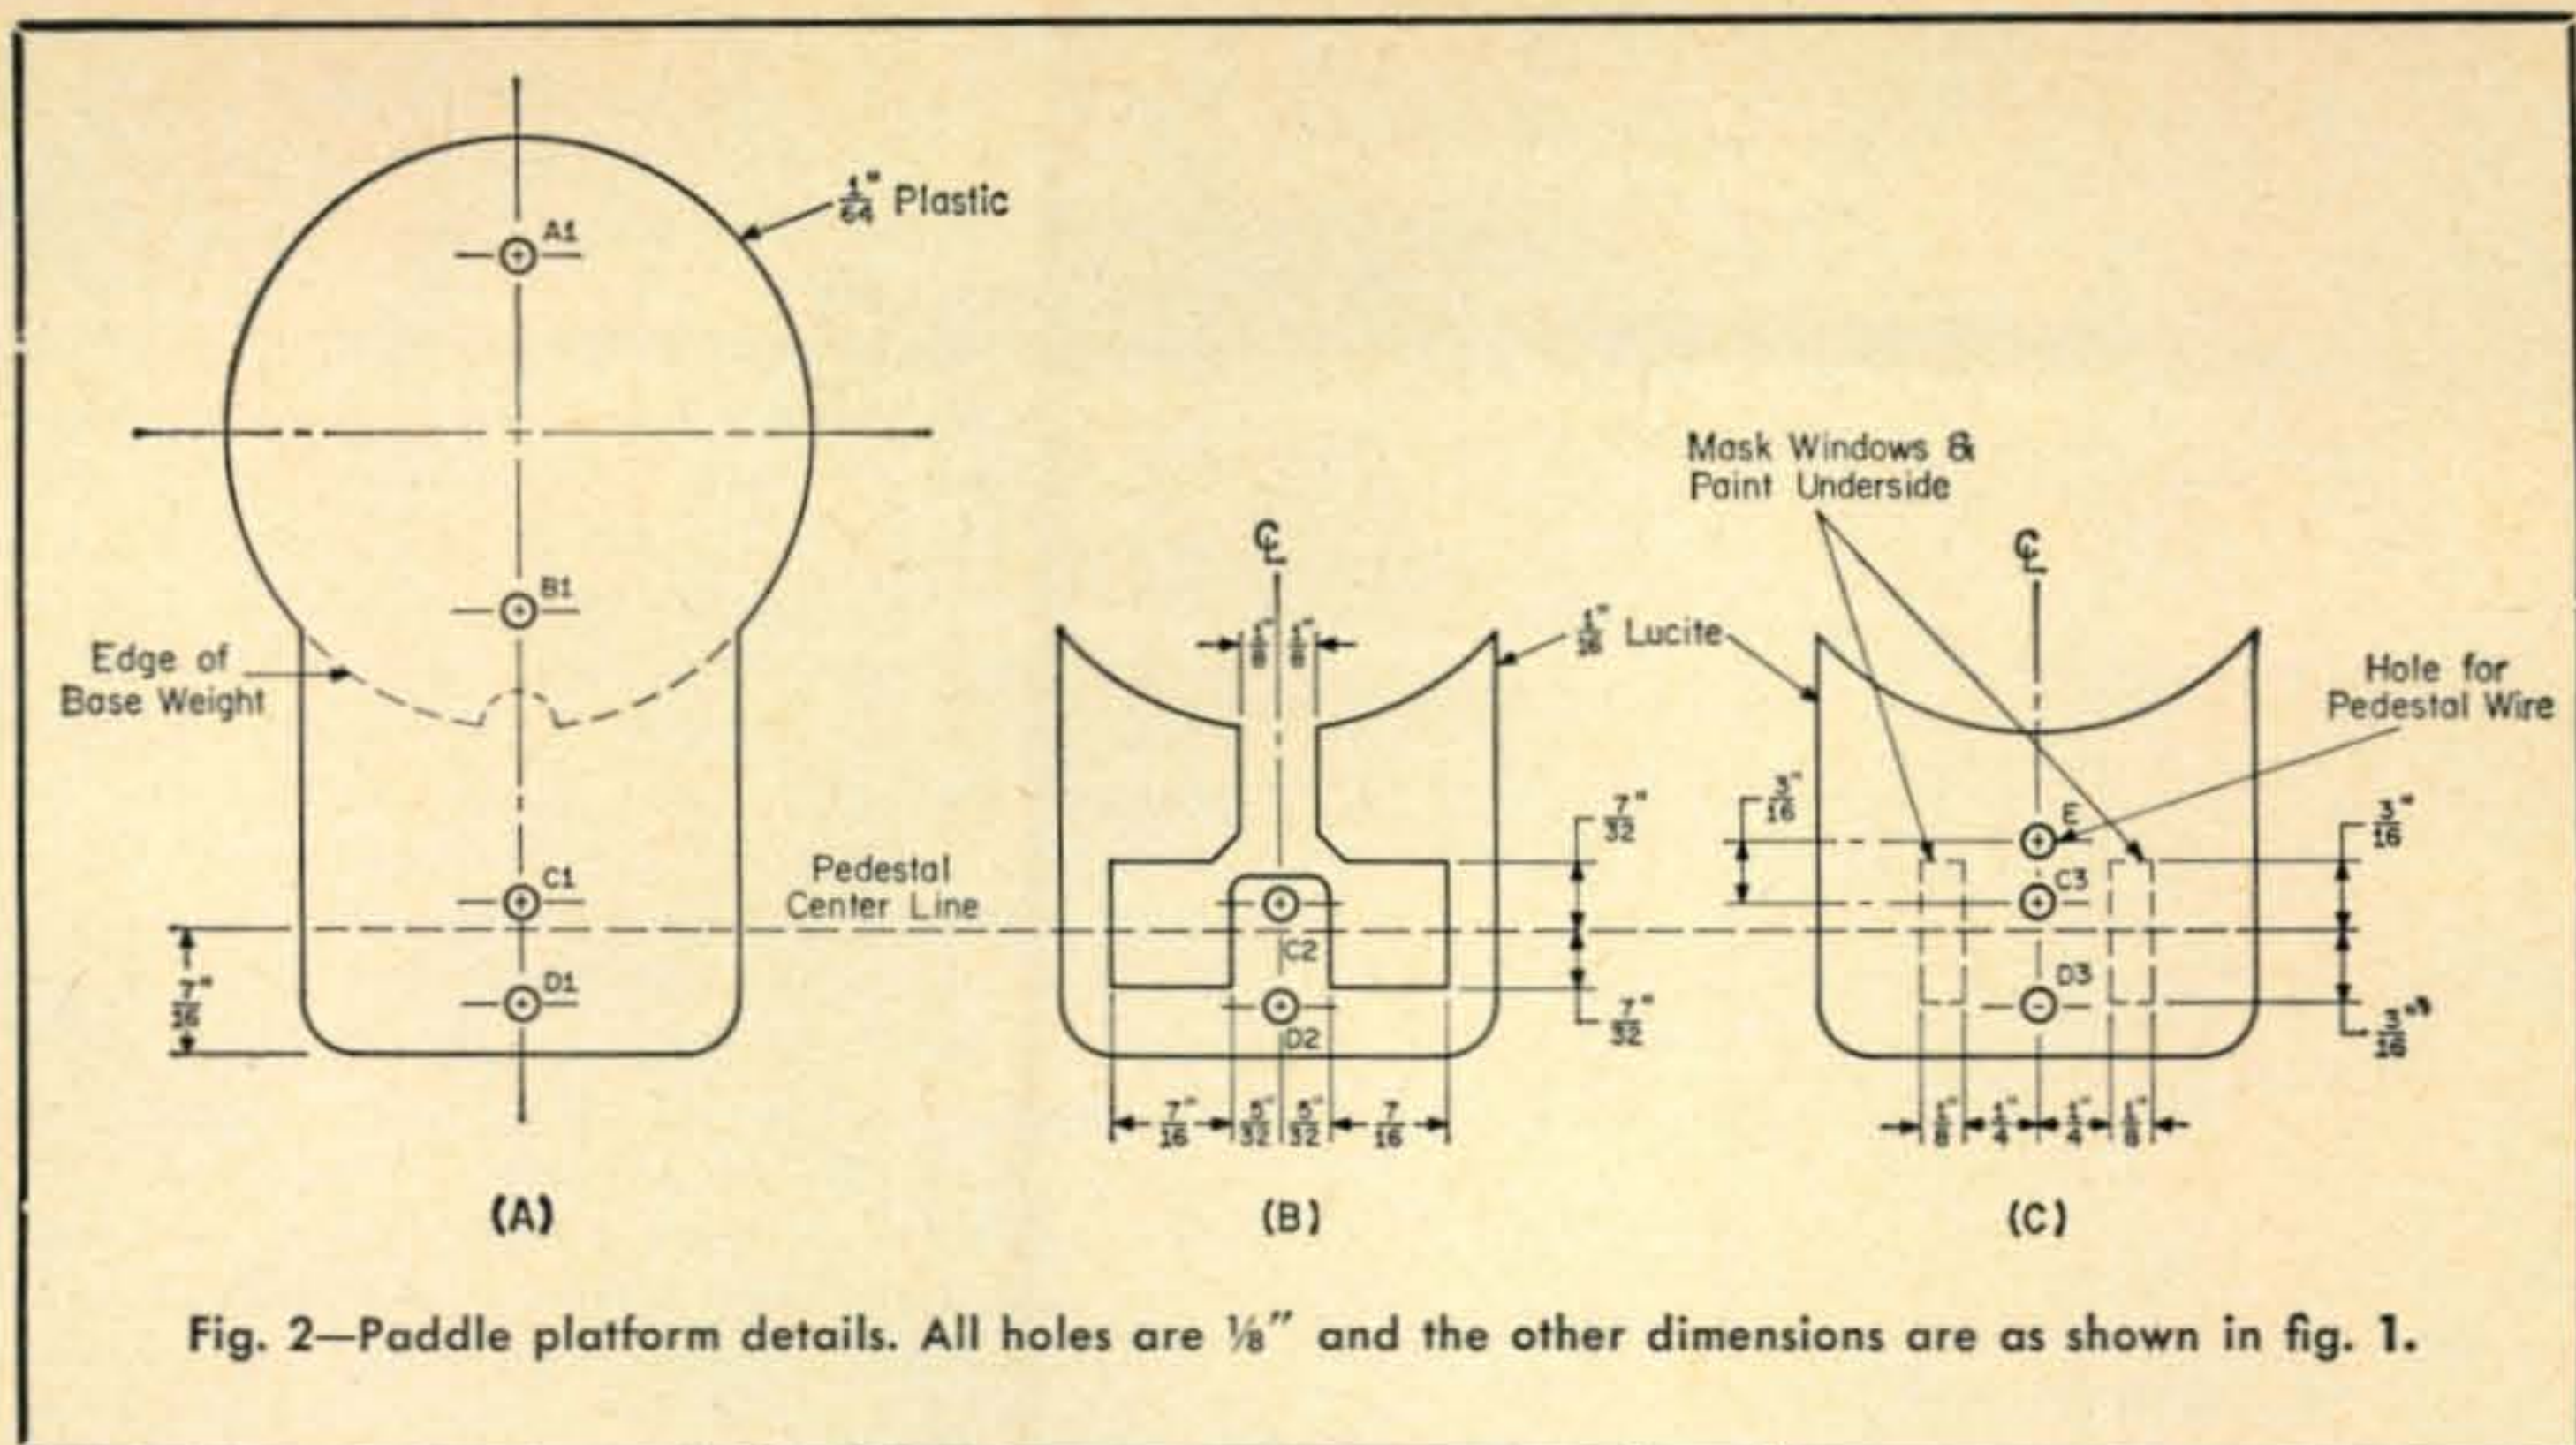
Paddle platform details. All holes are $\frac{1}{8}$ " and the other dimensions are as shown in fig. 1.
